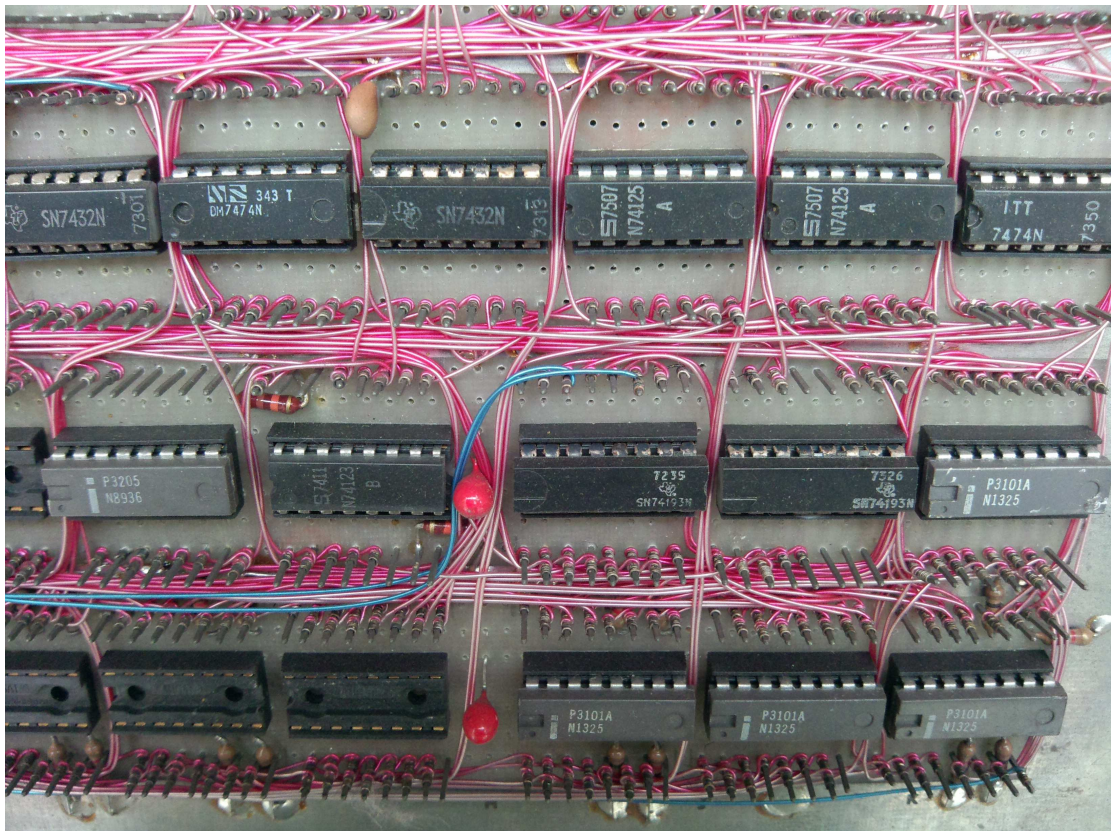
Burroughs B1714 prototyping board 1 Intel P8212 closeup
